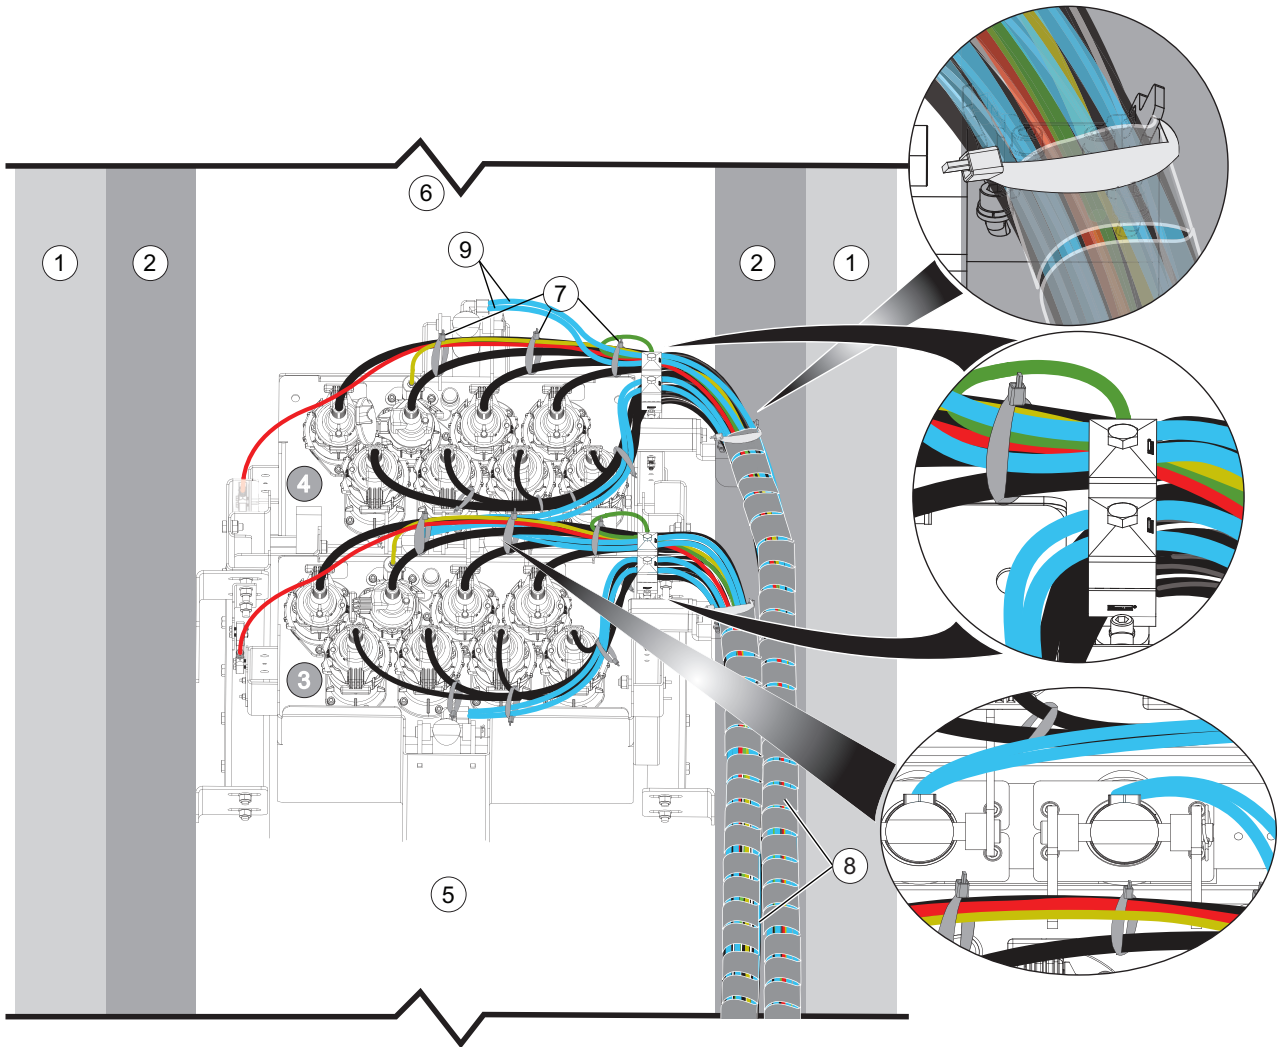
Cable Routing through Standard Bracket Assemblies - Spiral Wrap
